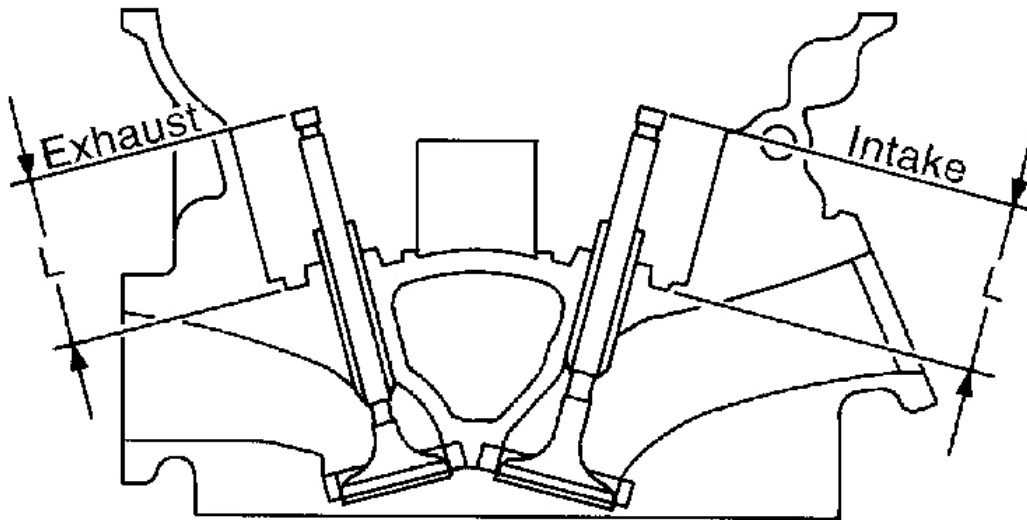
Cutting Or Grinding Valve Seat Using Suitable Tool To Specified Dimensions
